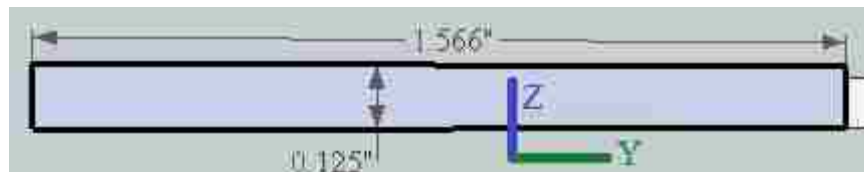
Cross sectional view of the 10x10 cm² lower trimmer aluminum plate illustrating the thickness and lateral in-plane and cross-plane dimensions of the plate. The lower trimmer is square, such that all non-hole dimensions are equal in the in-plane and cross-plane dimensions.
